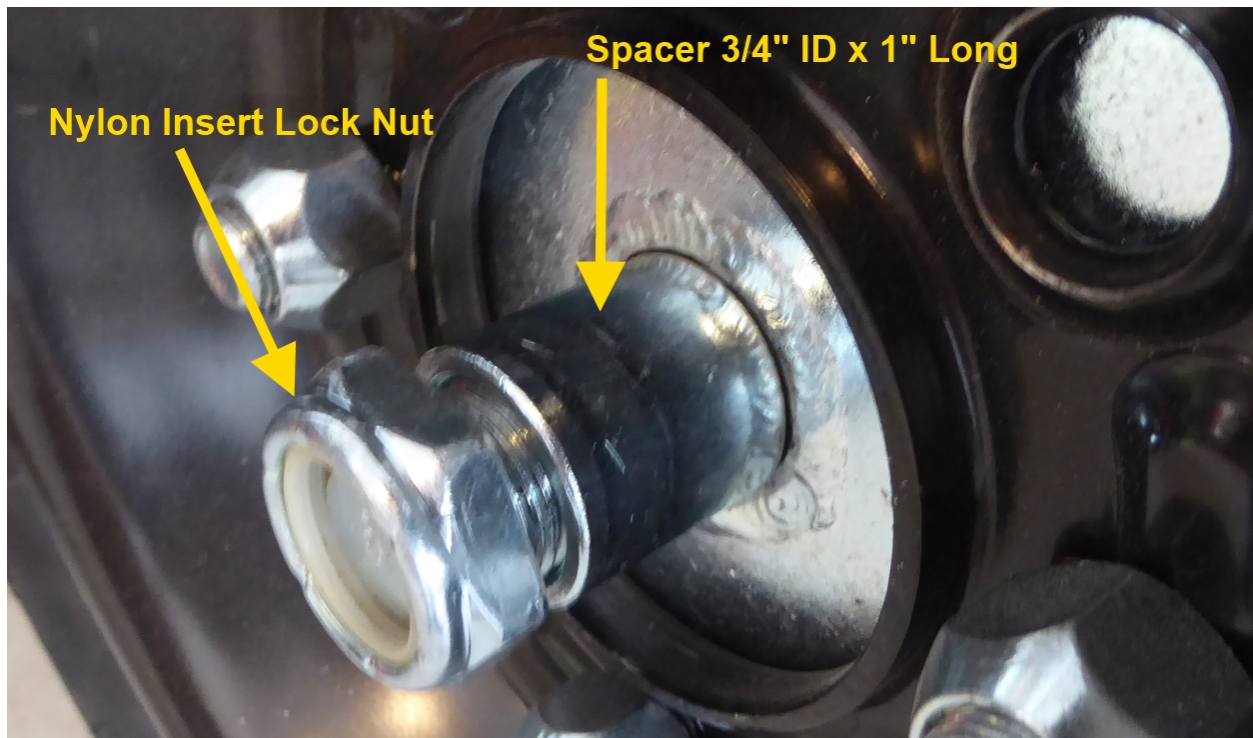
The wheel hubs are held to the shaft using a spacer & locknut. Drill a hole in the shaft and install a cotter pin after adjustment!
